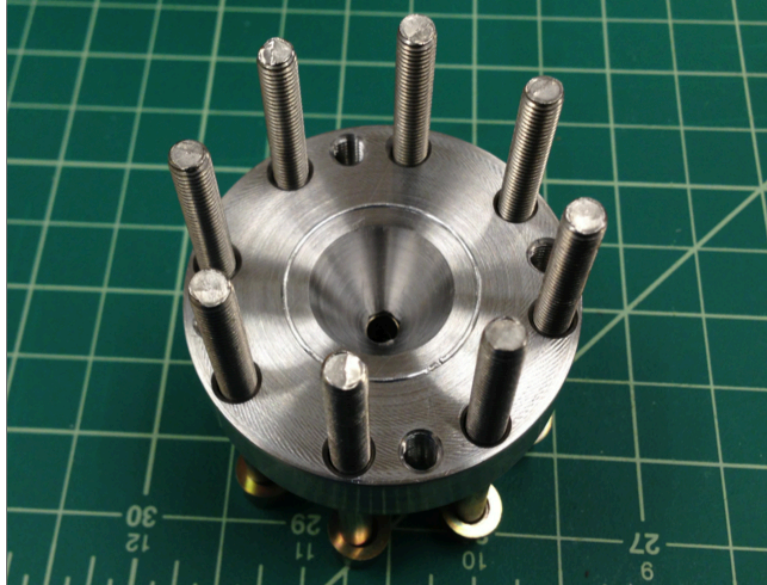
Indium seal in an O-ring groove on the transfer tube flange prepared for assembly.
